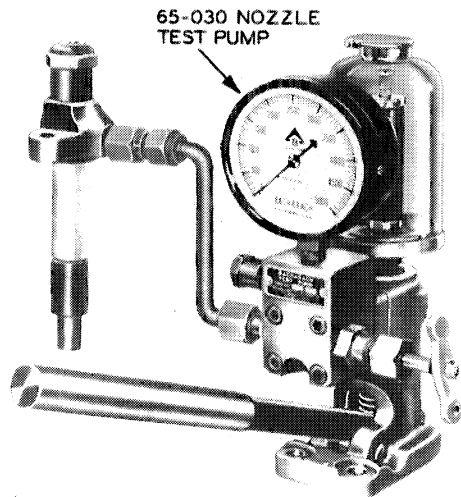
Checking the Fuel Injectors with the 65-030 Bacharach Nozzle Test Stand
